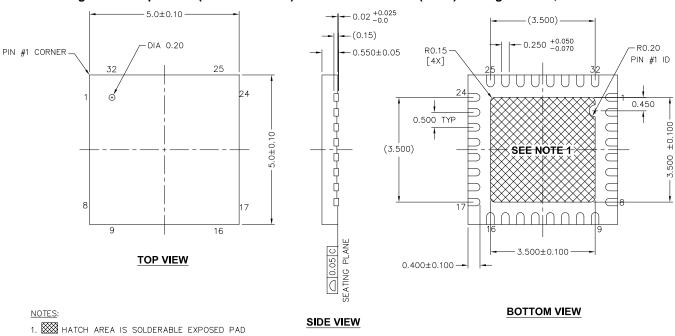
32-pin QFN (5 × 5 × 0.55 mm) LQ32 3.5 × 3.5 E-Pad (Sawn) Package Outline, 001-42168
